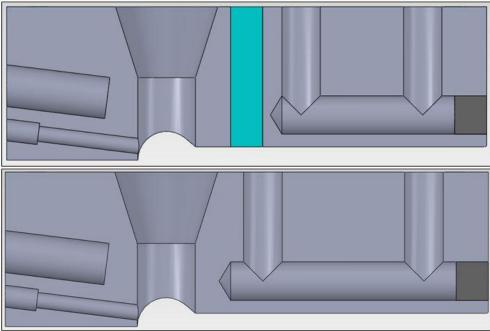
The picture shows that the horizontal cooling hole for the Shoulder without insulation (bottom picture) is longer than the cooling hole for the Shoulder with insulation (top picture)
